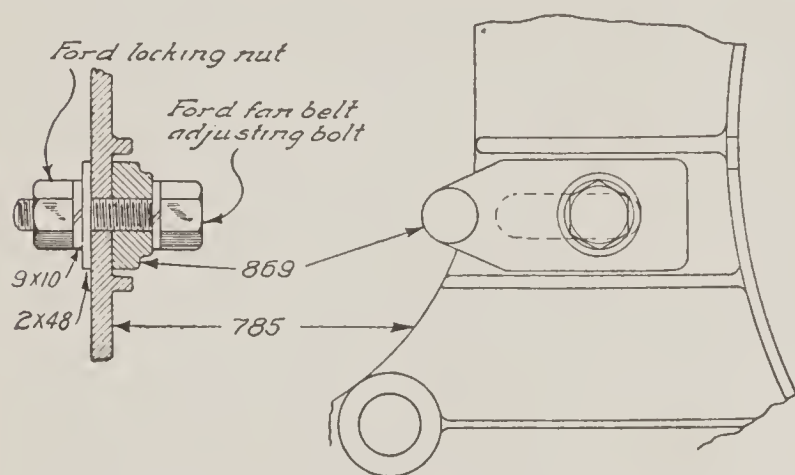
Correct Assembly for Belt Tightener for Heinze-Springfield Ford Installation
